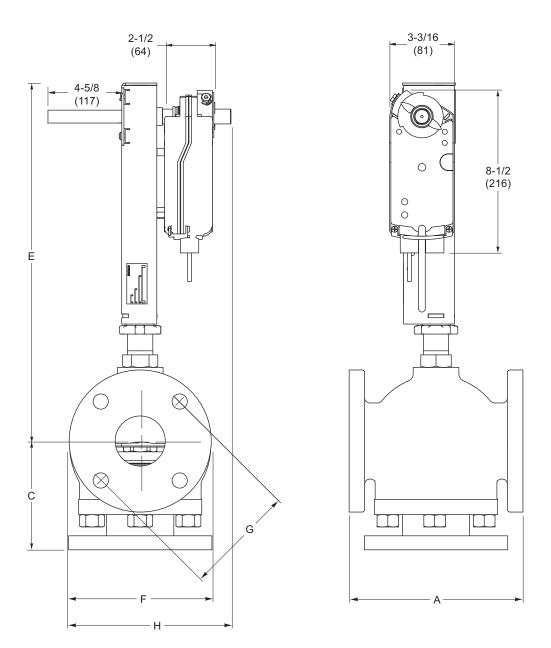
Mx41-6153 with 2-1/2" to 4" Flanged 3-Way Globe Valve With AV-607-1 Linkage.
